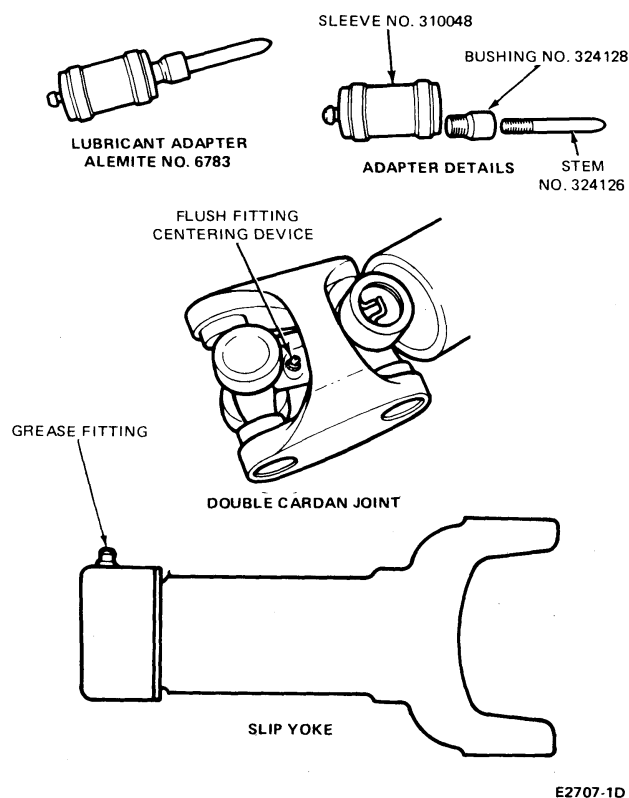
Lubrication Adapters—Double Cardan Universal Joint
